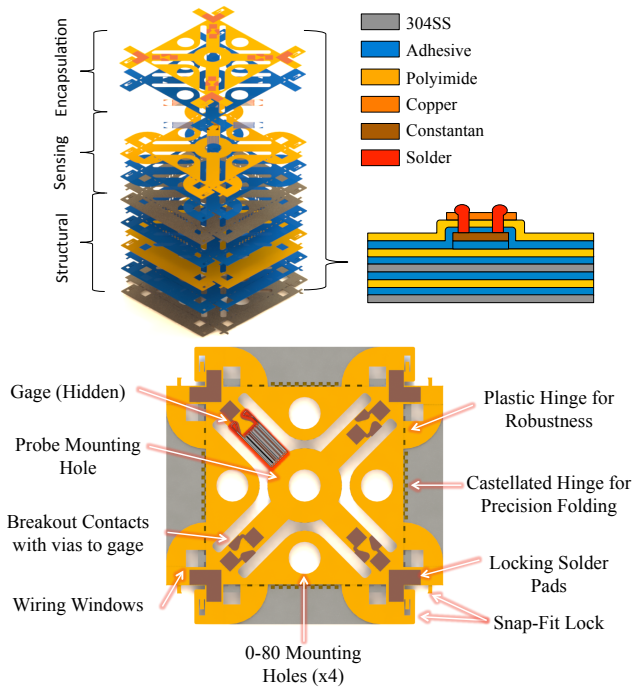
(top) exploded view of top layer, showing structural, sensing and encapsulation sublayers, (bottom) top view of sensor with callouts to various wiring and assembly features.
